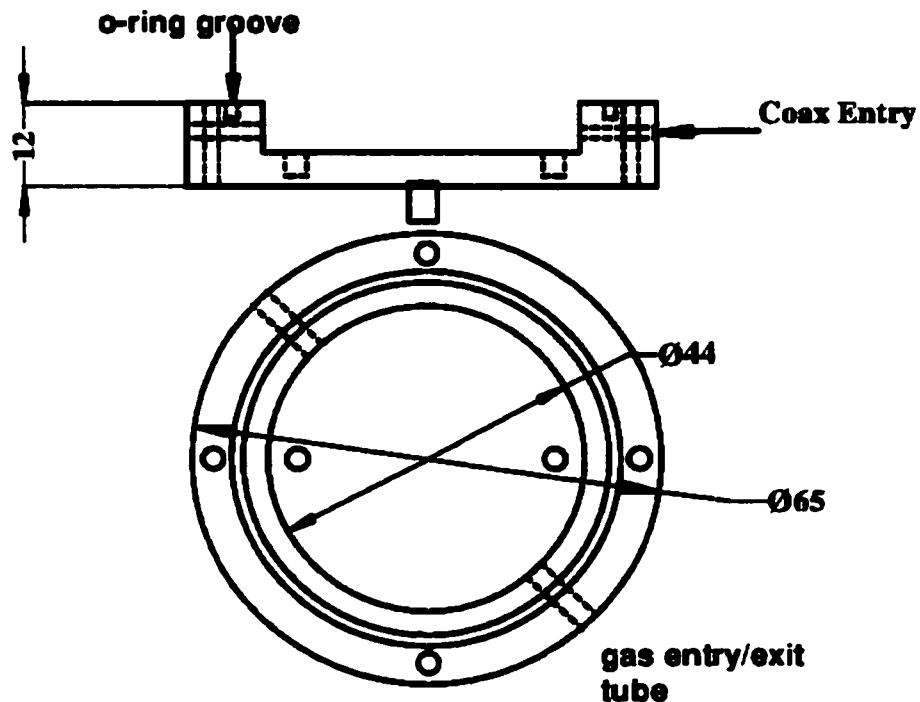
Sectional views of the detector body. All dimensions in mm.
